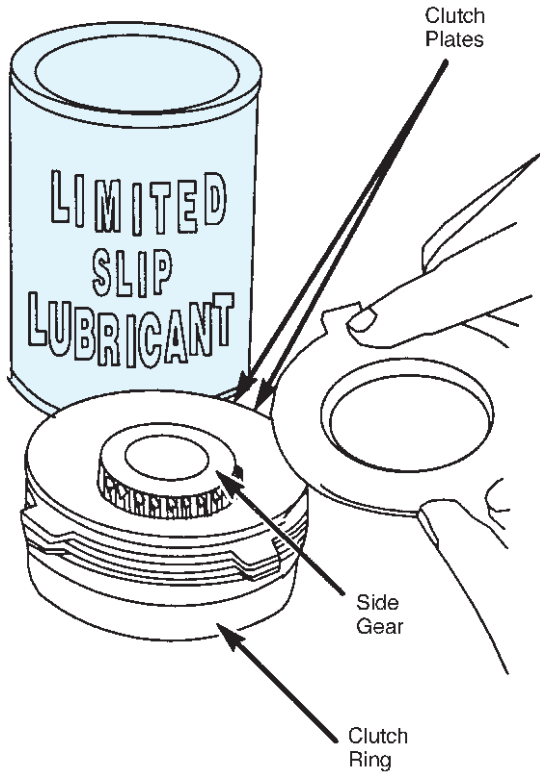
The clutch plates should be lubricated, using the proper type of lubricant, as they are assembled. (Courtesy of DaimlerChrysler Corporation)
